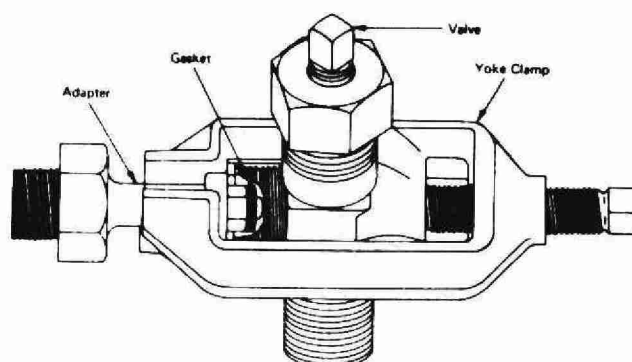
VALVE CLAMP AND ADAPTER ASSEMBLY
